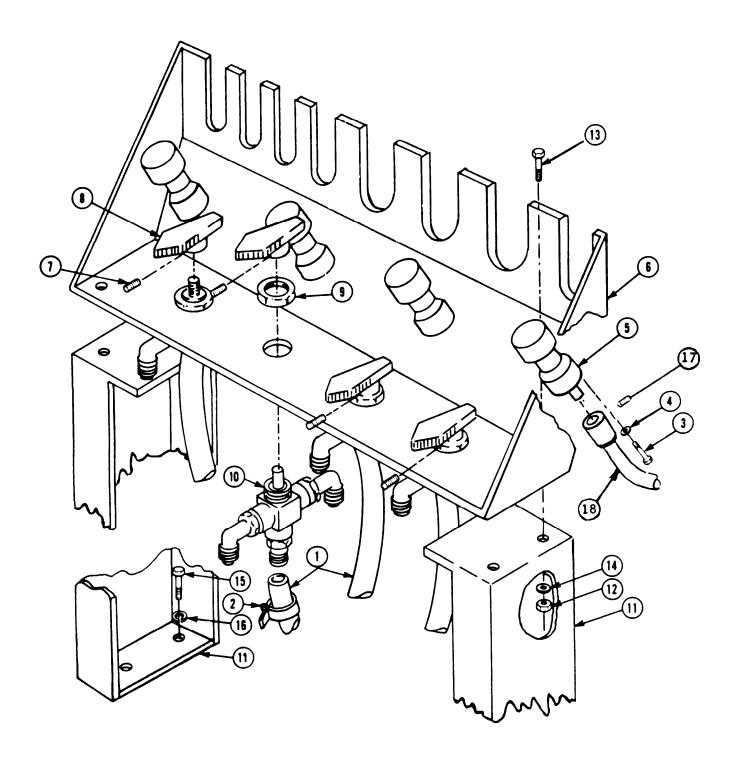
Chemical Feed Pump Frame and Valve Assembly (USMC)
